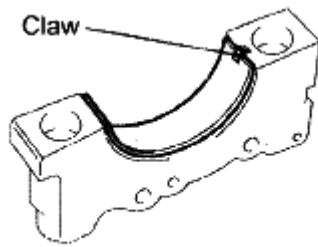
Installing Upper Bearing With An Oil Groove On Cylinder Block
